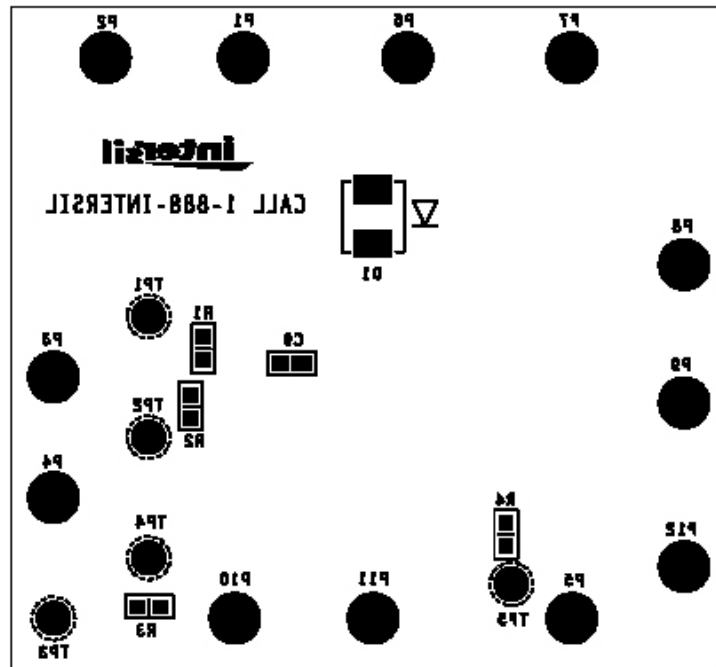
ISL6413 ENG1 - BOTTOM LAYER
